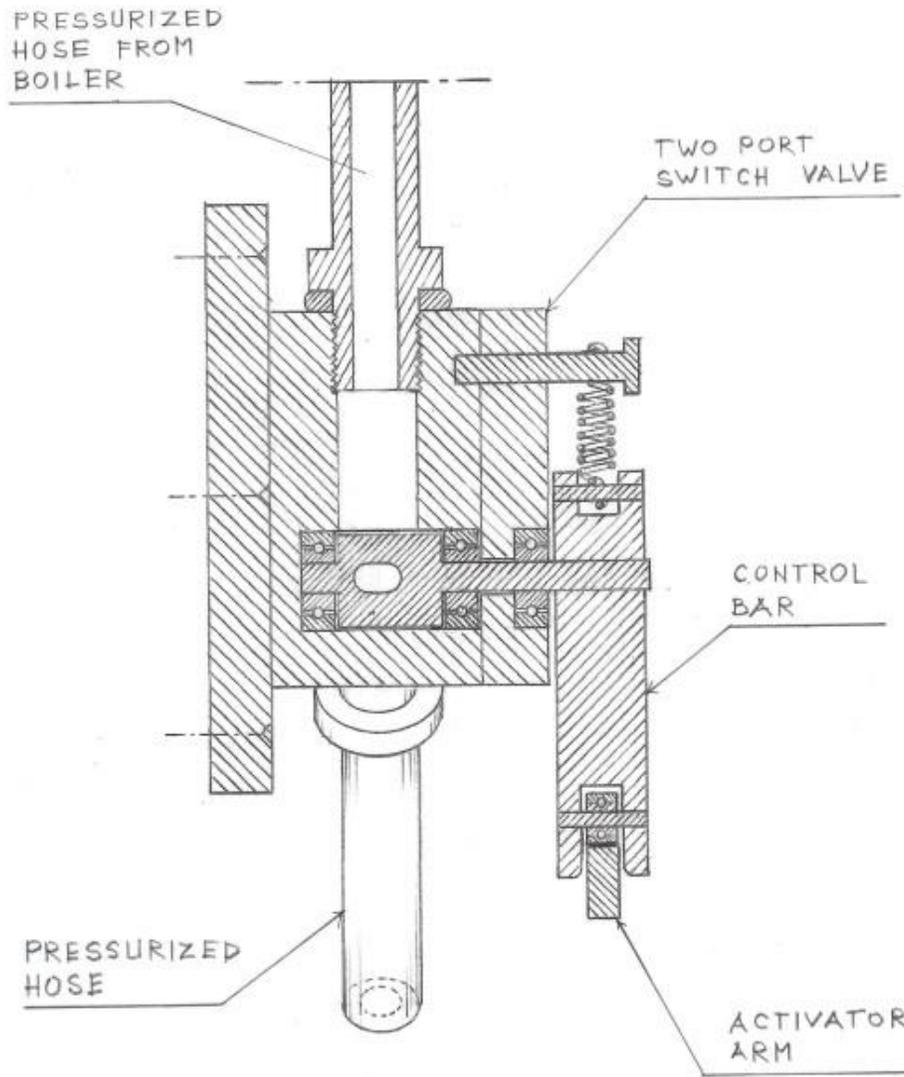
Cross-Sectional View of Two -Port Switch Valve used in Power Unit with Pistons.
